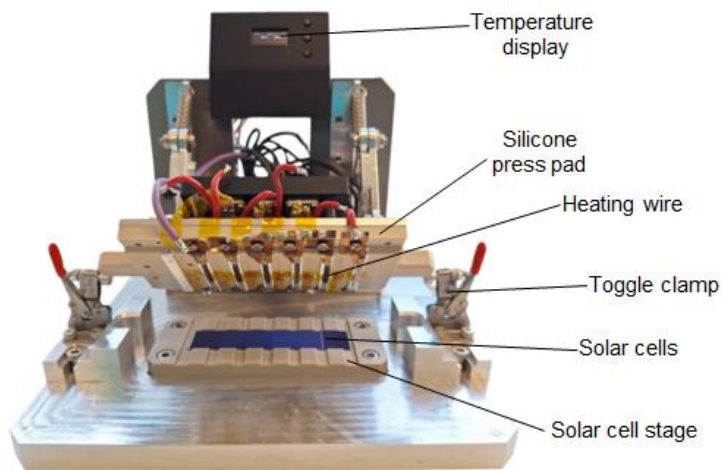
Custom-designed soldering machine used for producing shingle mini-modules, featuring temperature-controlled heating elements, silicone press pad, and toggle clamps for precise alignment and secure interconnection of overlapping solar cells.
